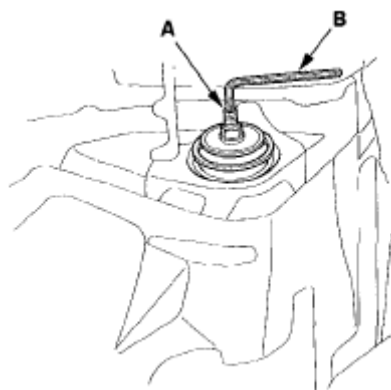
Tightening Self-Locking Nut (With Torque Specifications)
